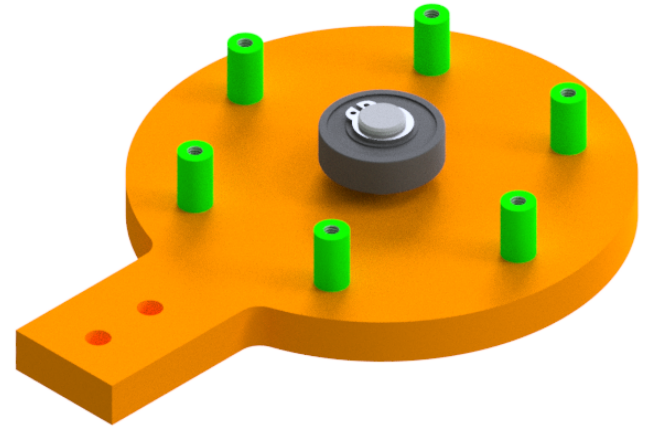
Part of the Torsional Spring containing the Cylindrical Interfaces
